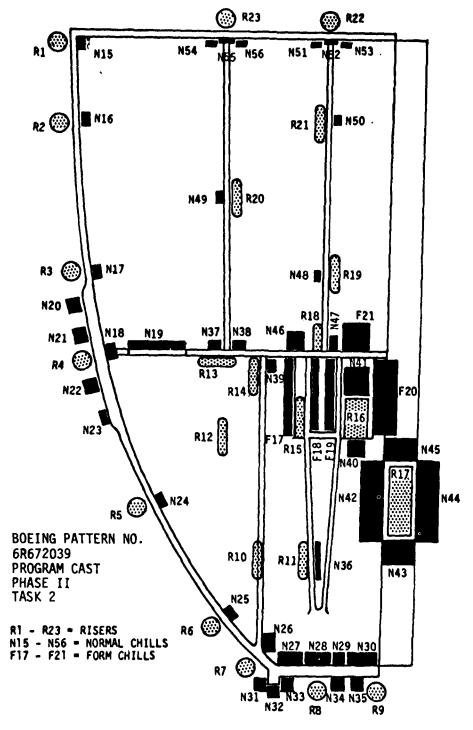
DETAILS OF COPE HITCHCOCK CASTINGS PART A
